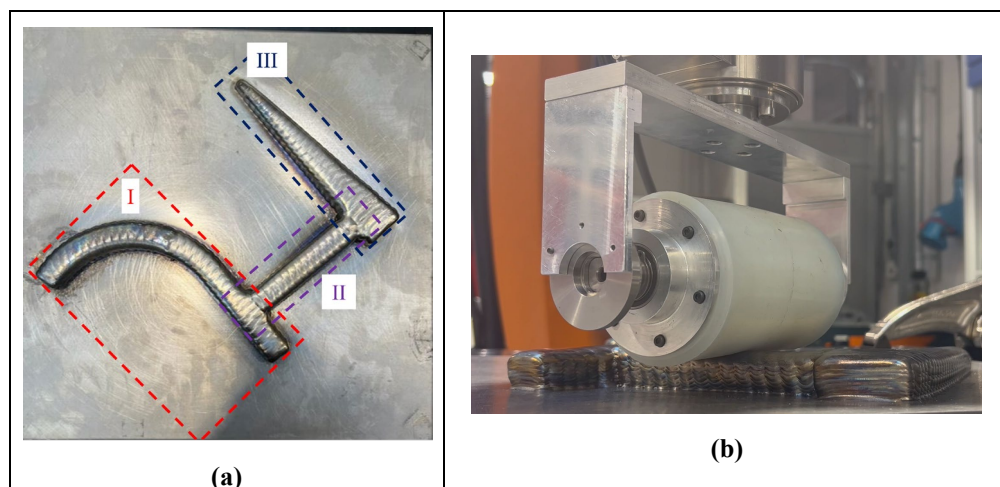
Experimental setup. (a) Experimental Specimen (b) Dry-coupled roller-probe setup inspecting an as-built WAAM specimen
